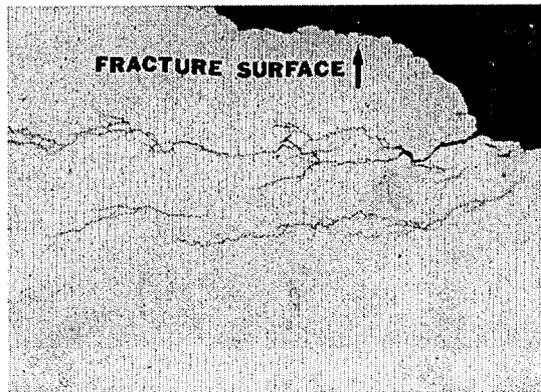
Fracture surface of origin of cracking on failed screw head. Mag. 630X
